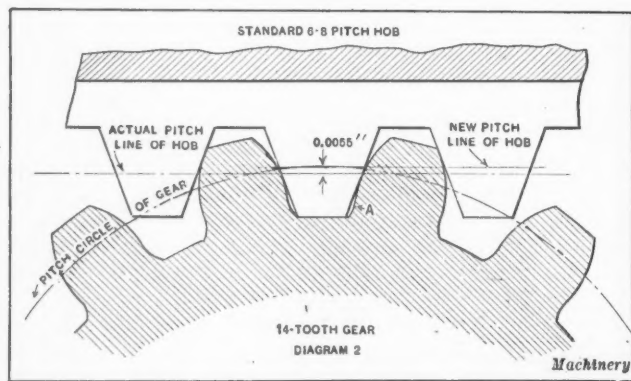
Cutting Fourteen-tooth Gear Deeper than Standard to give Backlash between the Gears
